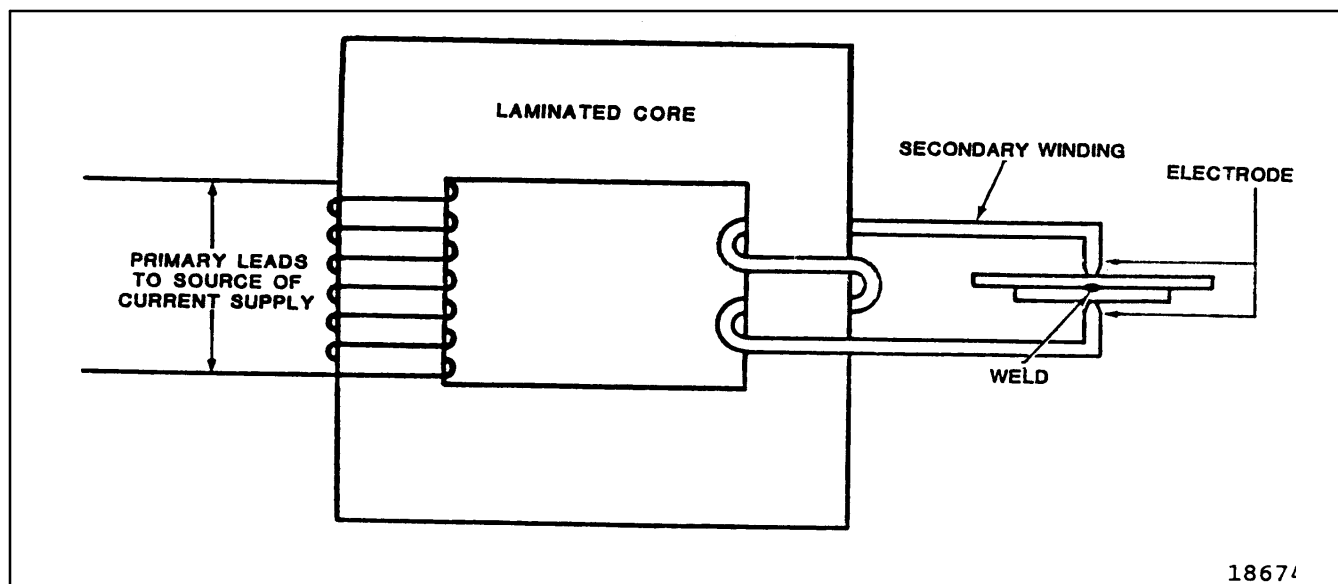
Schematic Diagram of Resistance Spot Welder
